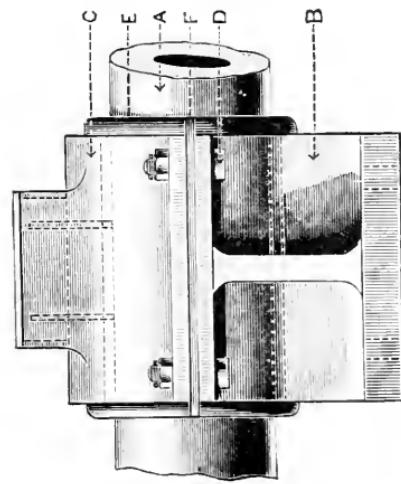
PEDESTAL BEARING, OR PLUMMER BLOCK.
